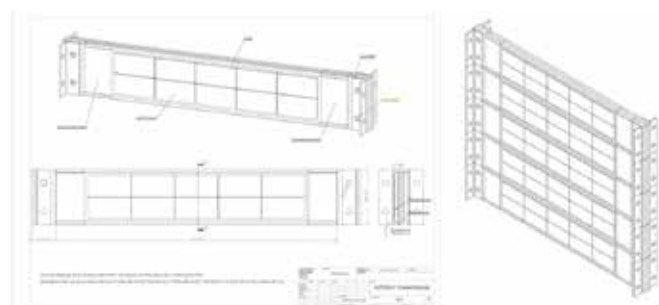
An image of the module assembly showing three staves with five mechanical units clamped by L-shaped joints
